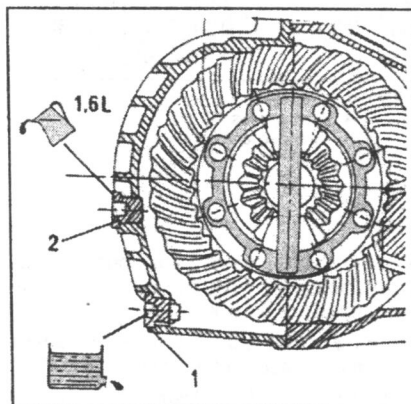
The location of the oil drain plug (1) and filler plug (2) of a 4WD vehicle.
